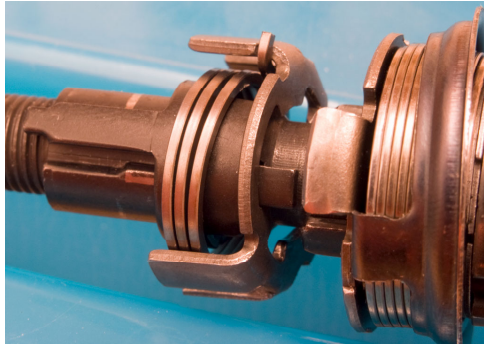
The small spring at in the assembly at the left slides away from the return spring assembly.
